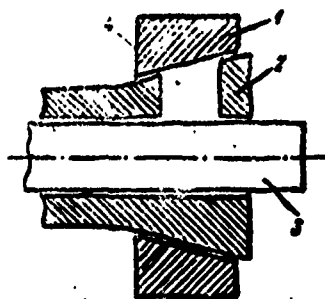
The design scheme of the rotating chuck. 1 - ring; 2 - clamp body; 3 - welding part; 4 - jaw.
